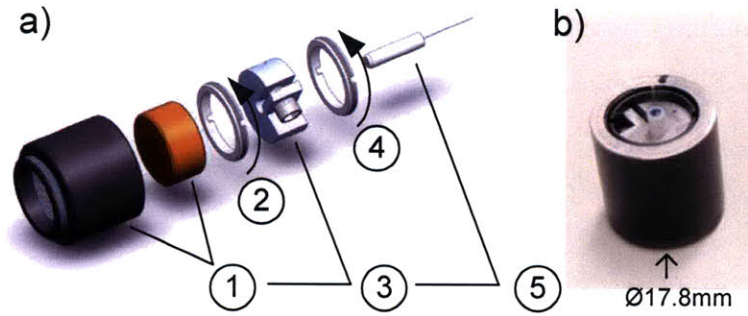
Butt-coupling scheme between FC/PC fiber connector and SBR (version 3). (a) model and (b) photo of the assembly. Numbers indicate the sequence of assembling.
